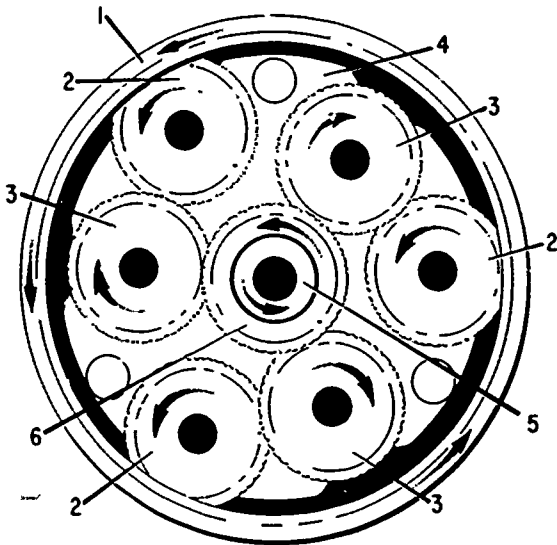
(PLATE CLUTCH ENGAGED, ROLLER CLUTCH DISENGAGED)
